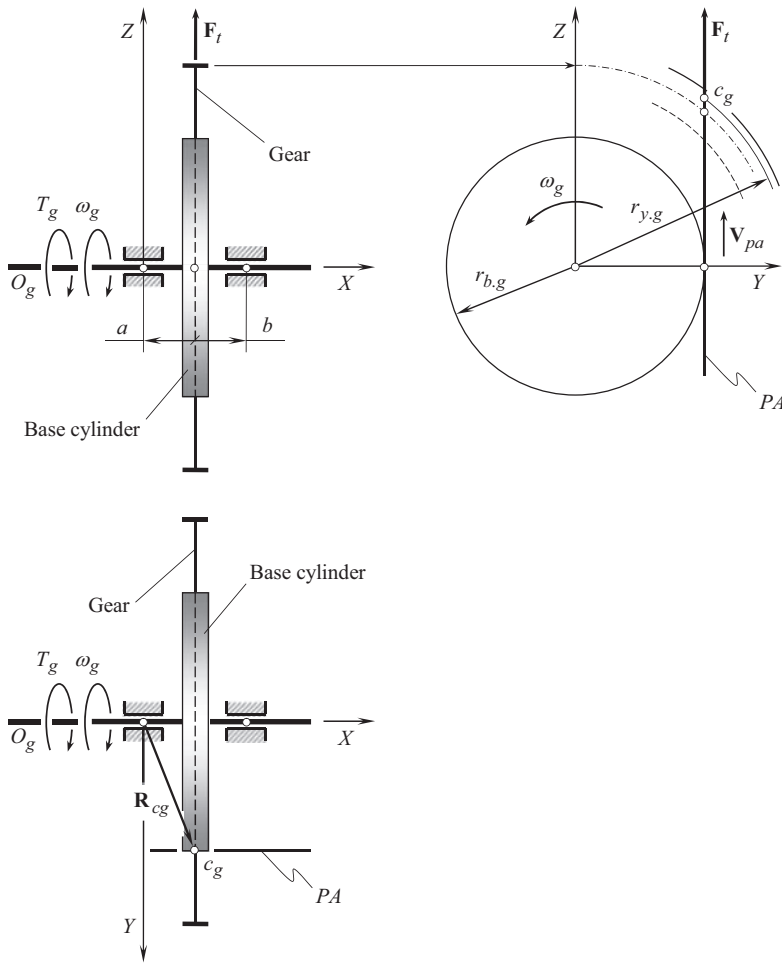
Bending torque in geometrically accurate spur parallel-axes gearing.
